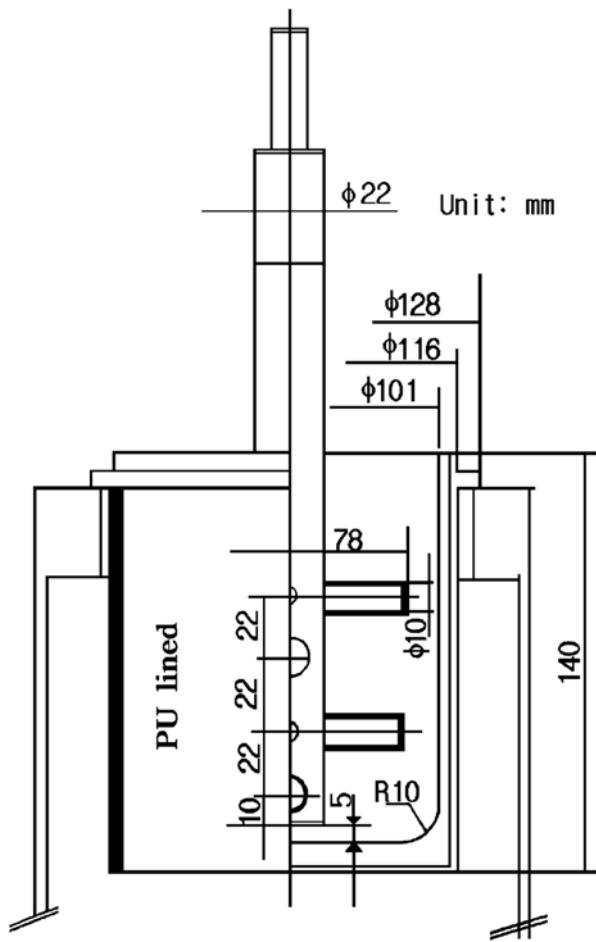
Dimensions and shape of grinding mill pot of experimental stirred ball mill.
